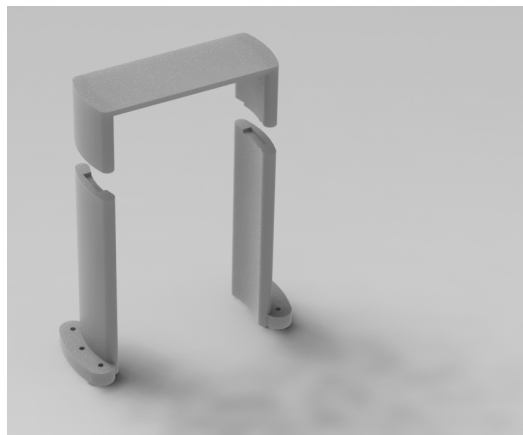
SolidWorks render of 3D printed stand to attach to DAMS-7000 (exploded view)
